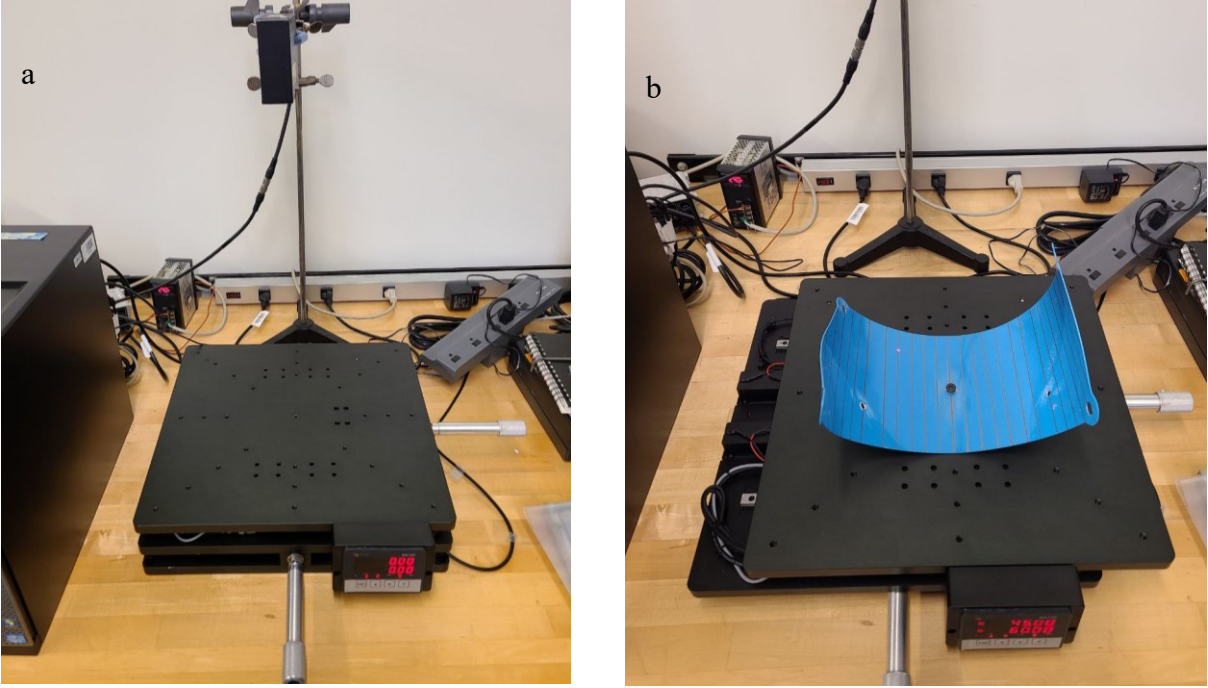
Laser coordinate measurement machine. Left: Machine Plate. Right: Sample on machine plate.
